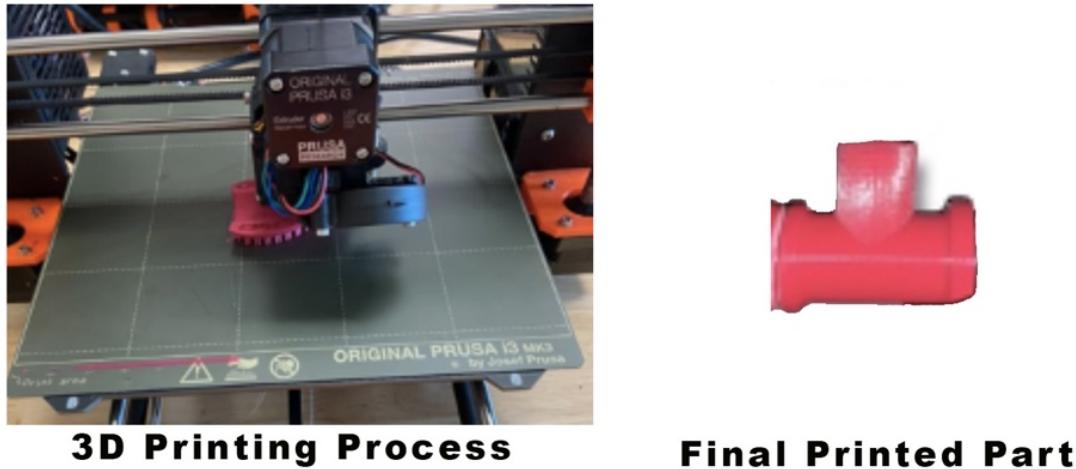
PRINTING PROCESS AND FINAL HEART PUMP PRINT
